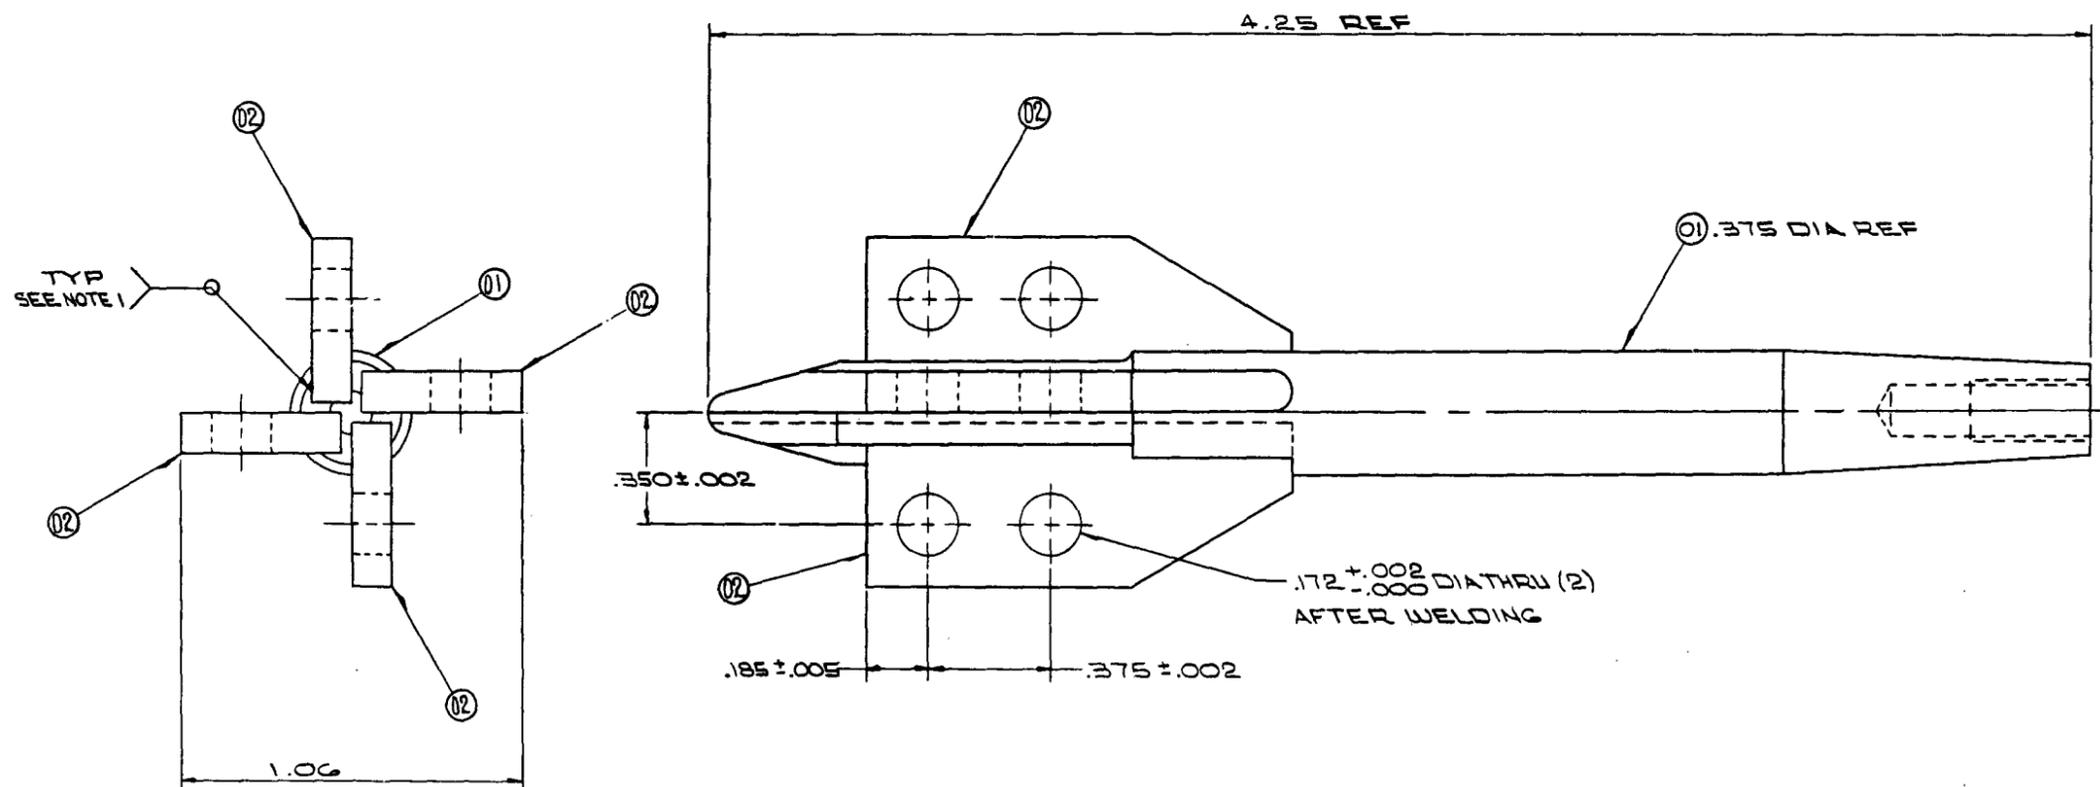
FLECHT SEASET Natural Circulation Four-Heater-Rod Terminal Assembly (sheet 2 of 2)
